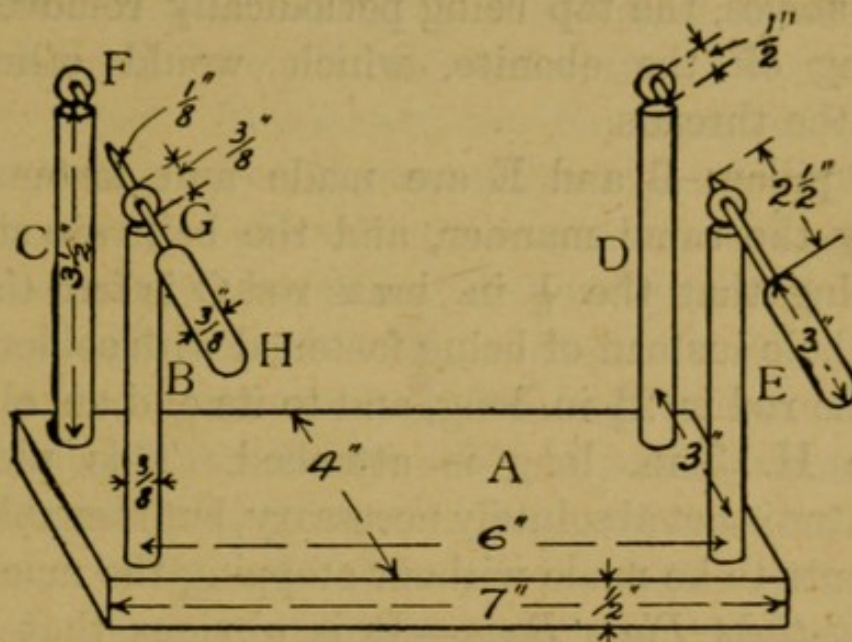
Spark-gap apparatus for use with a Wimshurst machine.
